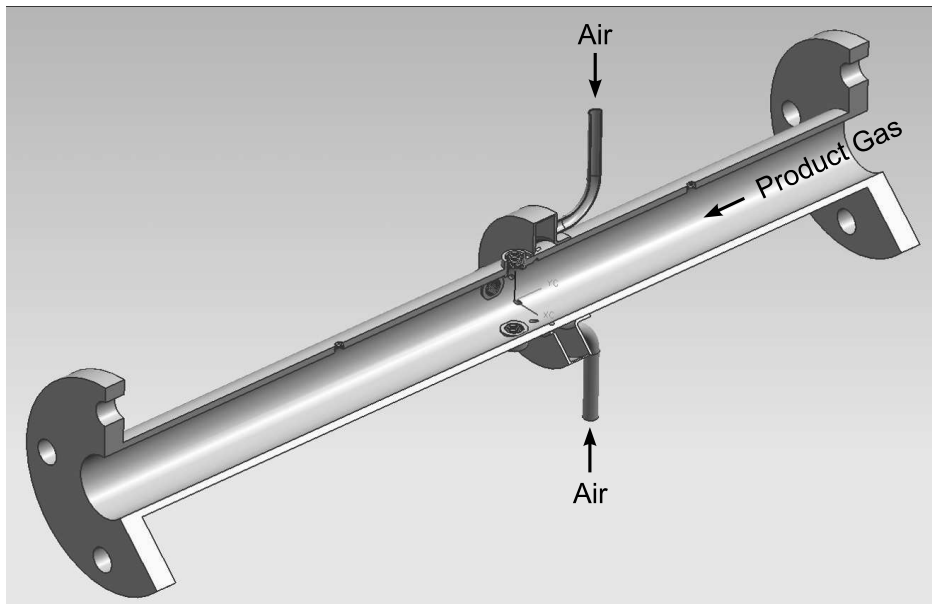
Design drawing of up-scaled swirl-burner, spark plugs and thermocouples not shown.
